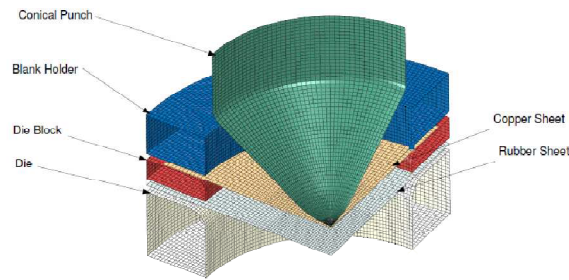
Finite Element Model of Rubber Assisted Deep Drawing Setup
